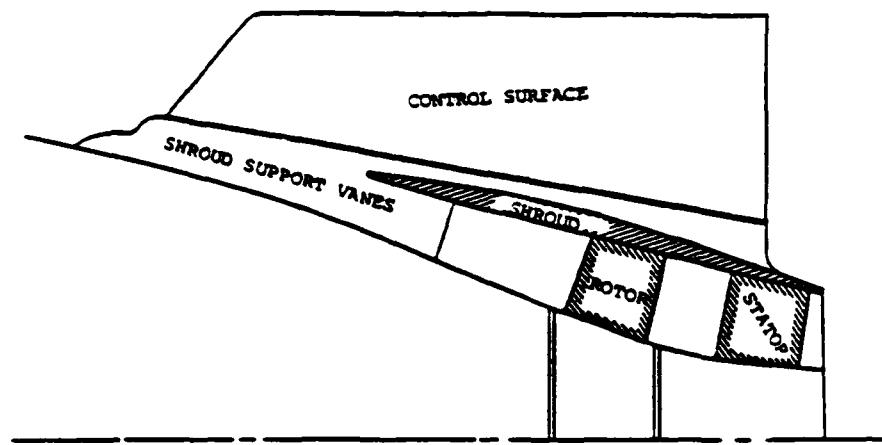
A TYPICAL PUMPJET BLADE AND SHROUD CONFIGURATION
